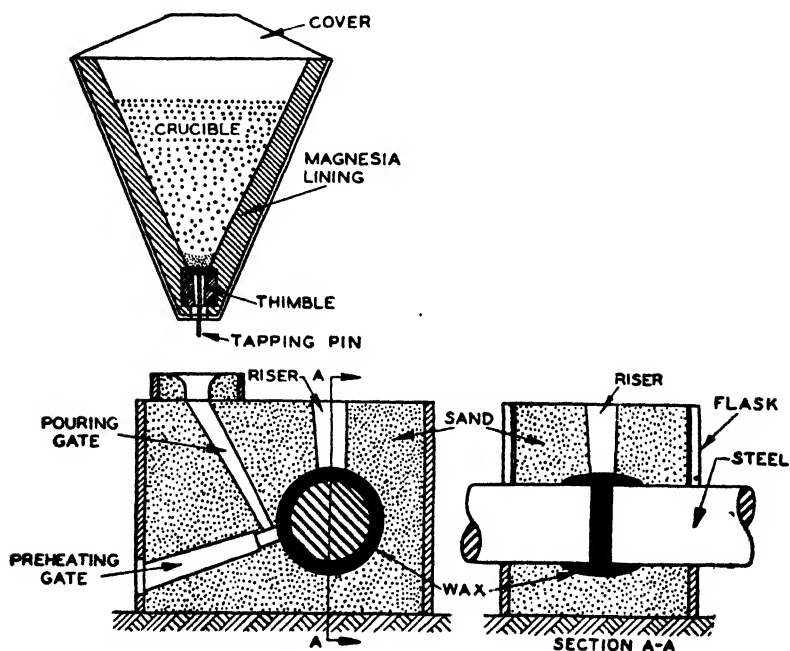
EQUIPMENT AND MOLD FOR "THERMIT" WELD
